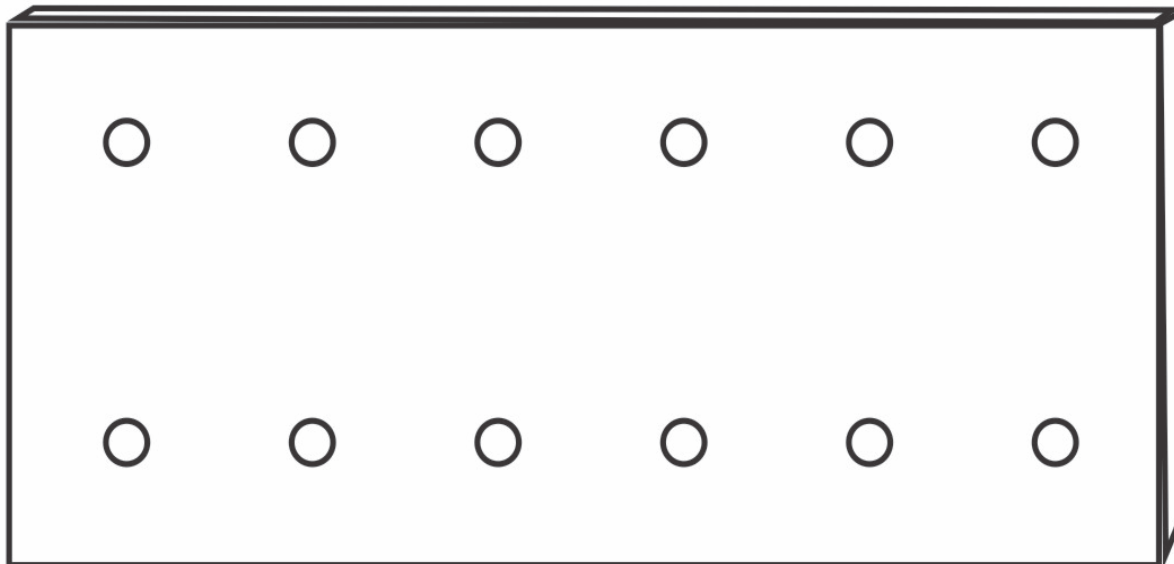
Holes for fixing of sockets and switches on the top cover of the extension board.
